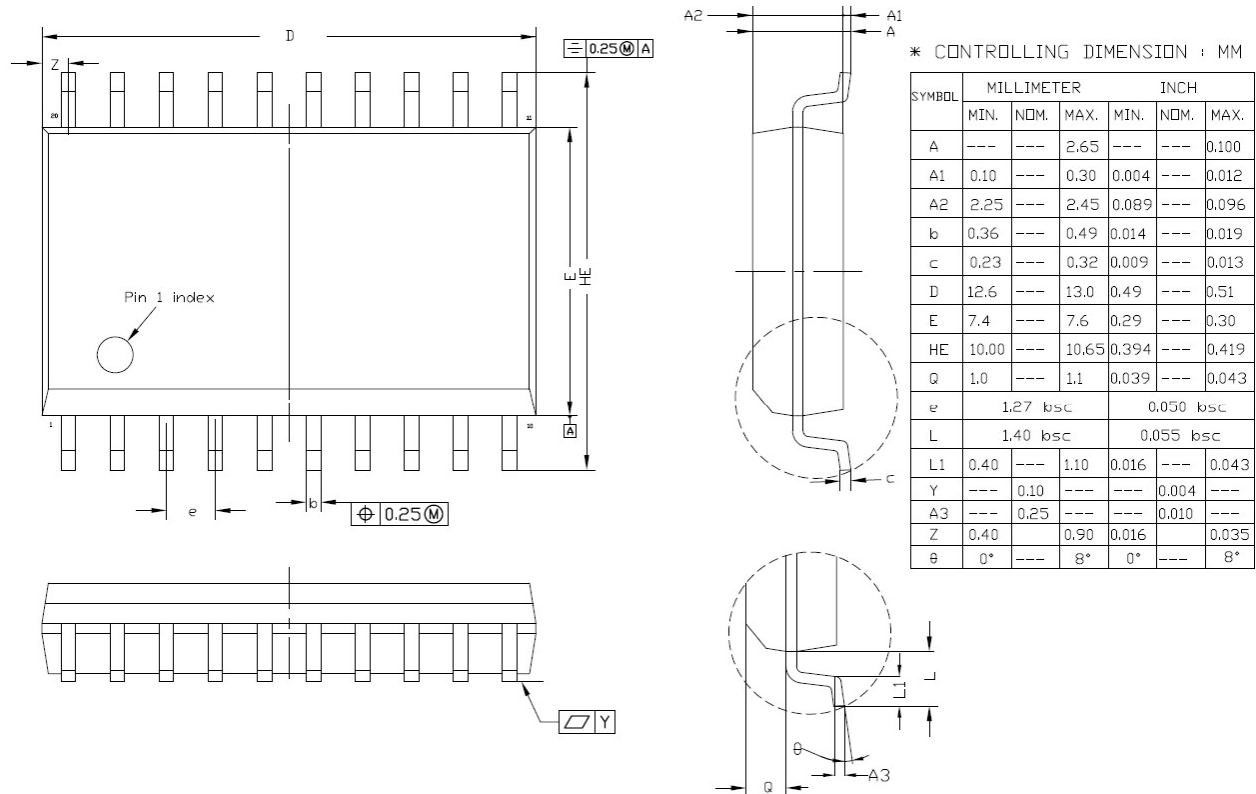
SOW20 Package Shape and Dimension in millimeters
